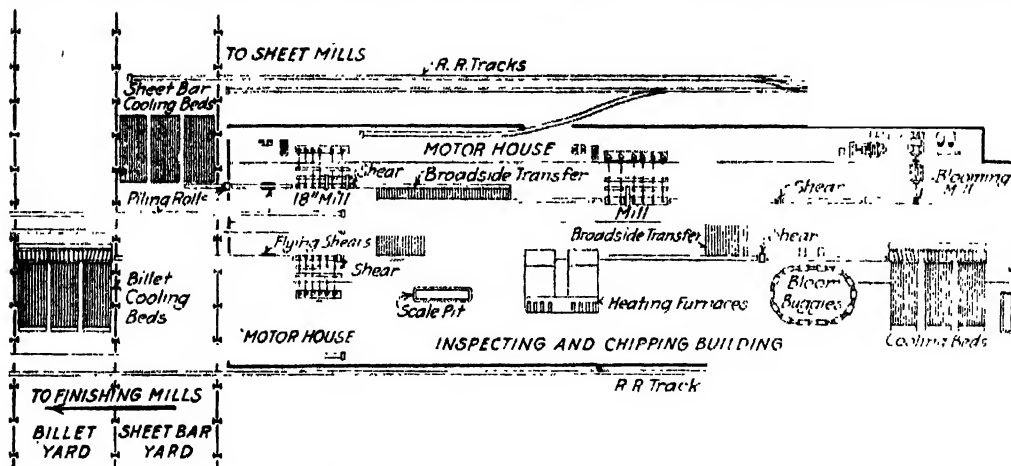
Blooming Mill, Billet Mill and Sheet-Bar Mill Arranged for Special Conditions of Flexibility
